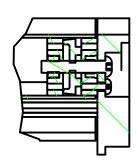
DETAIL D - HOW THE FRICTION DISC ADJUSTMENT SYSTEM WORKS
